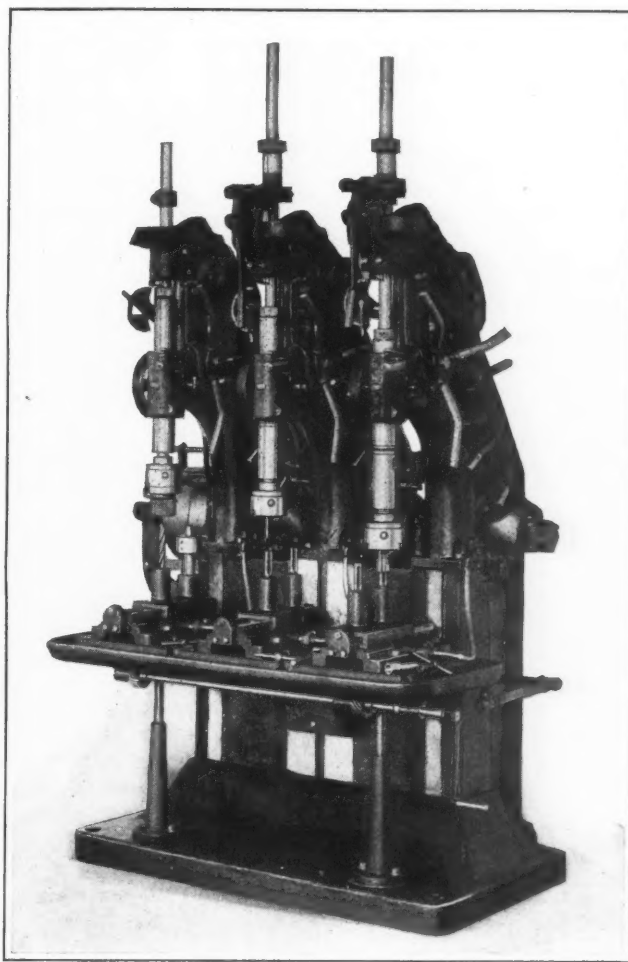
Barnes Drill Co.'s Three-spindle All-gear Drilled equipped for drilling, facing and tapping Steel Plugs
